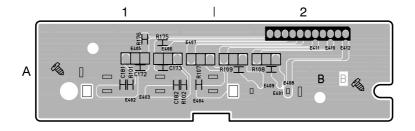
EU55 Front Jack PC Broad (Bottom side)
